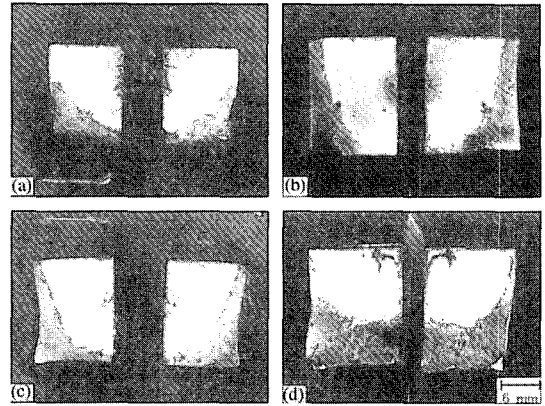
Fractures of fatigue-tested specimens with surface cracks
